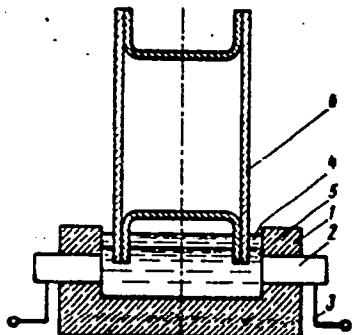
Diagram of setup for welding by the method of immersion in a pool of molten metal:
